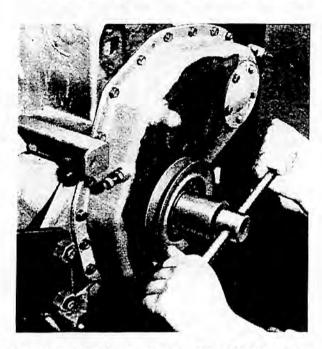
REMOVING STARTER JAW (SERVICE TOOL MFB16)
